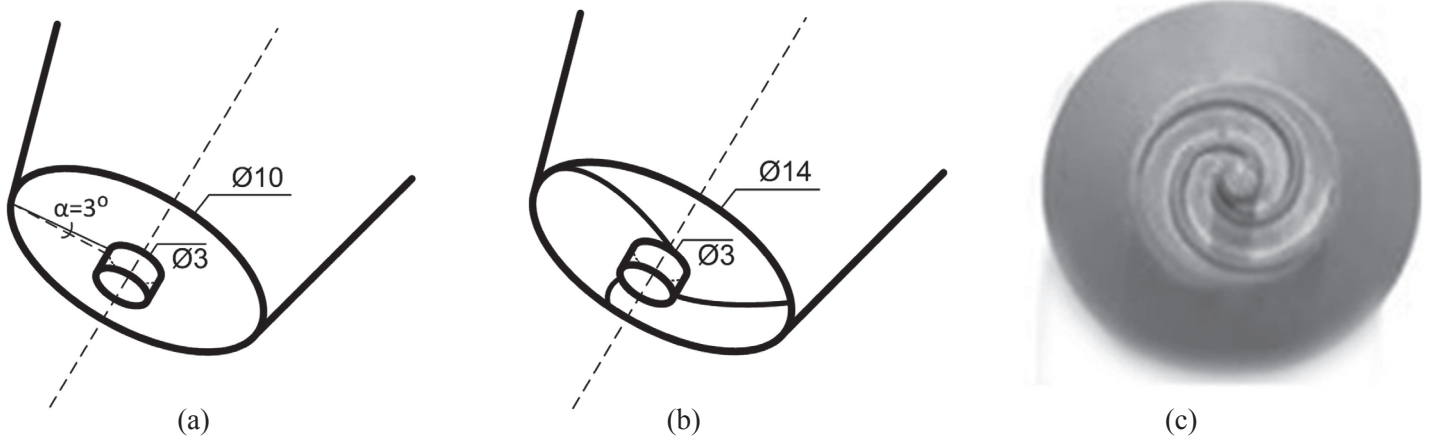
Scheme of a C10 Conical tool (a) and scheme (b) and picture (c) of a S14 Scrolled tool.
